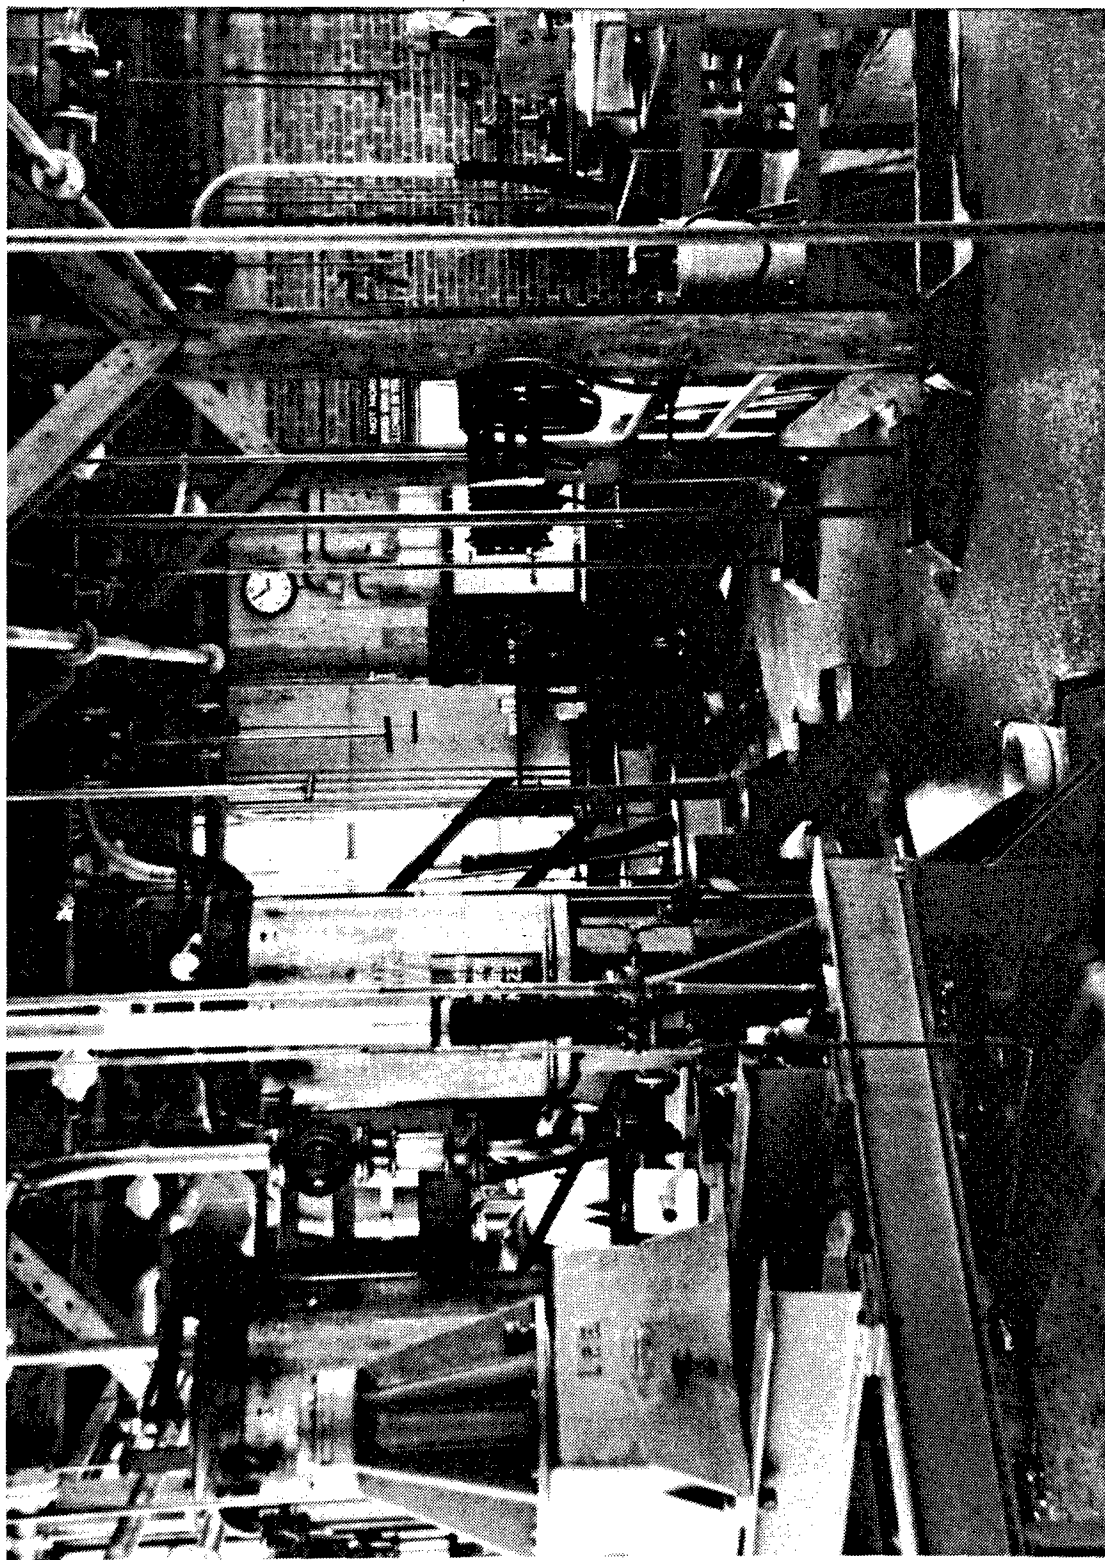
Interior, E Building (courtesy of Holston AAP Photo Set No. 21-B [on file Engineering Vault, Building 26]).
